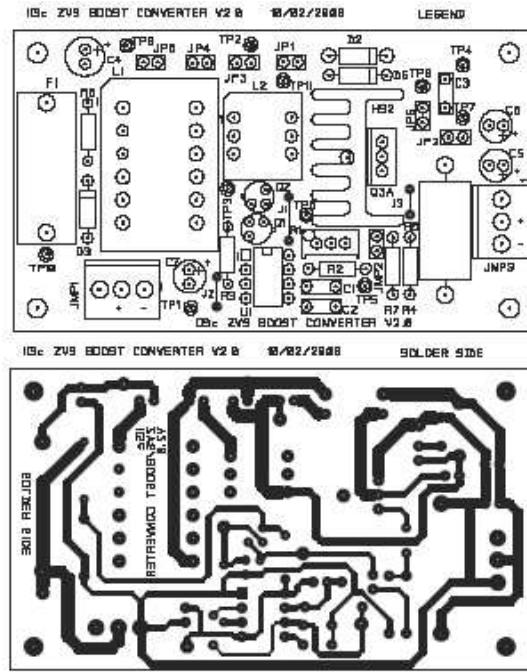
Solder and Component Side of ZVS-Boost Converter
